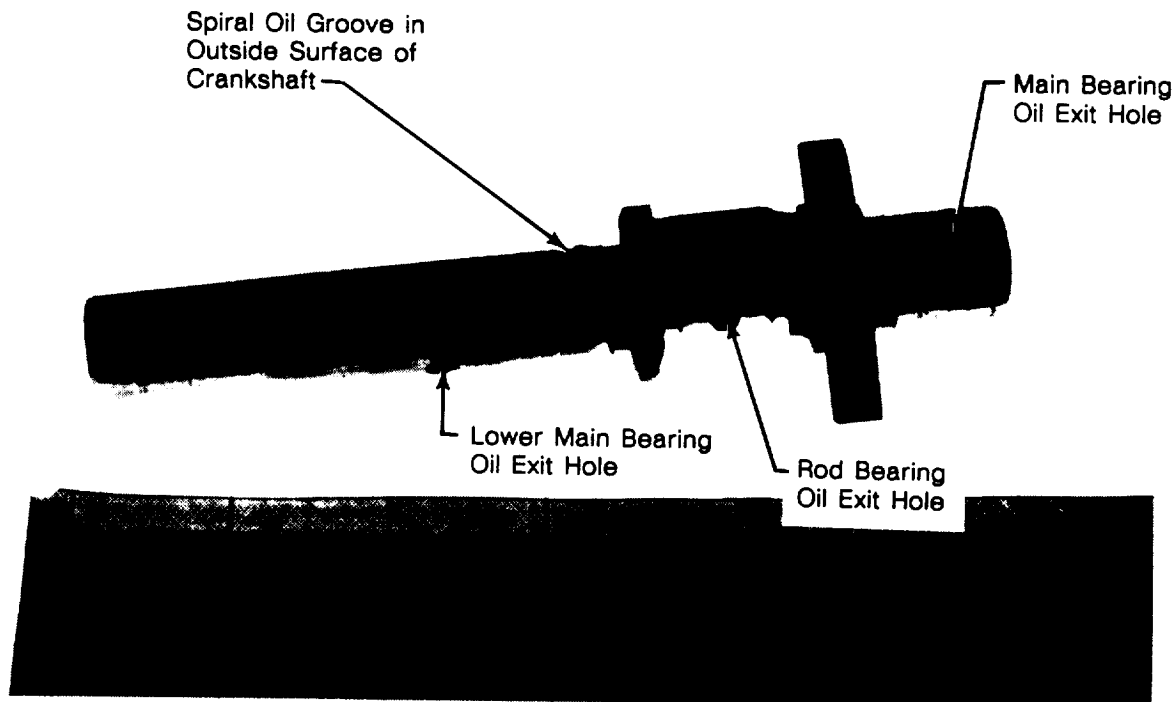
Typical Freon Compressor Crankshaft with the Motor Armature and Oil Slinger Removed (Scale = in.)
